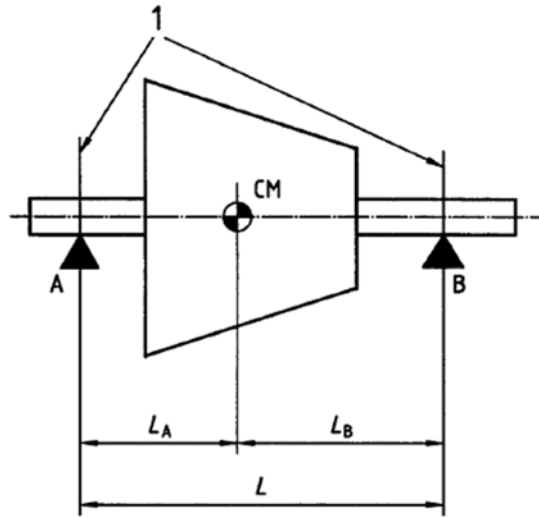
Tolerance planes 1 in bearing A, B and relative position with respect to center of mass (CM) for rotors with CM located between the bearings (*ISO 1940-1, 2003*).
